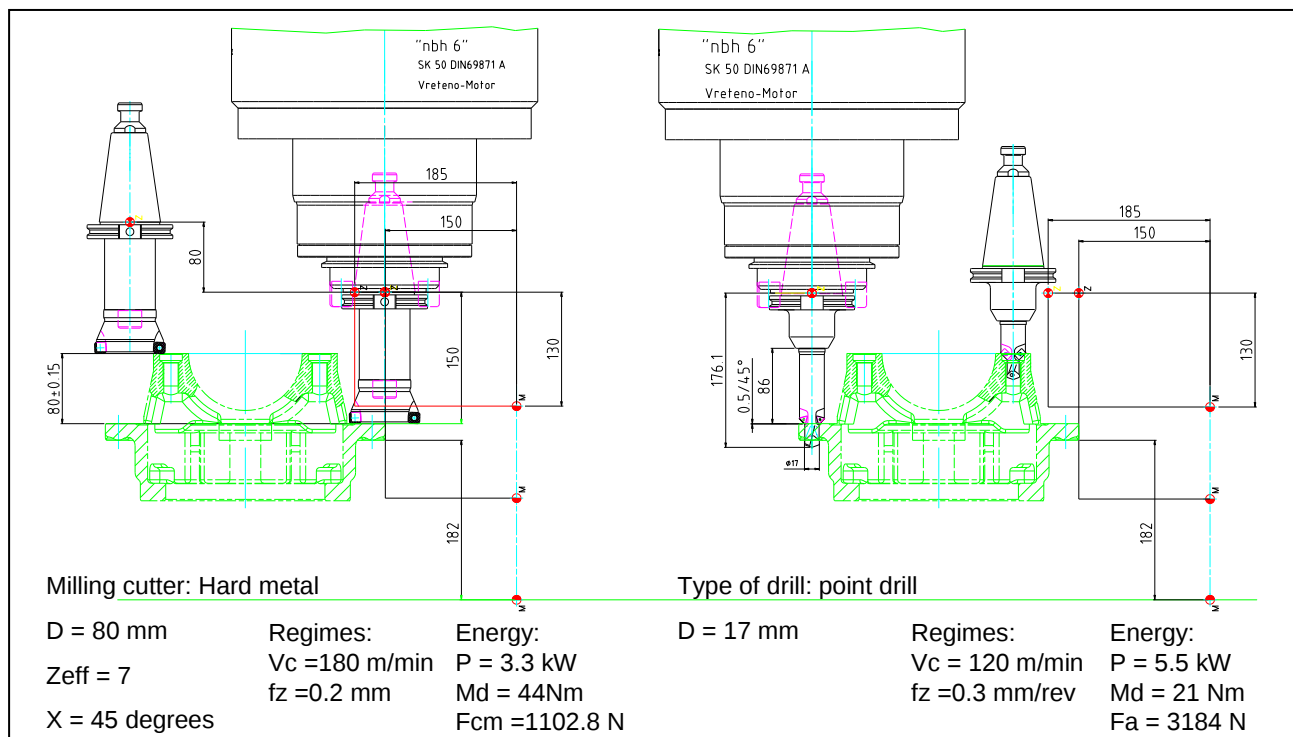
Analysis of the cutting tool, tool accessibility, and cutting forces
